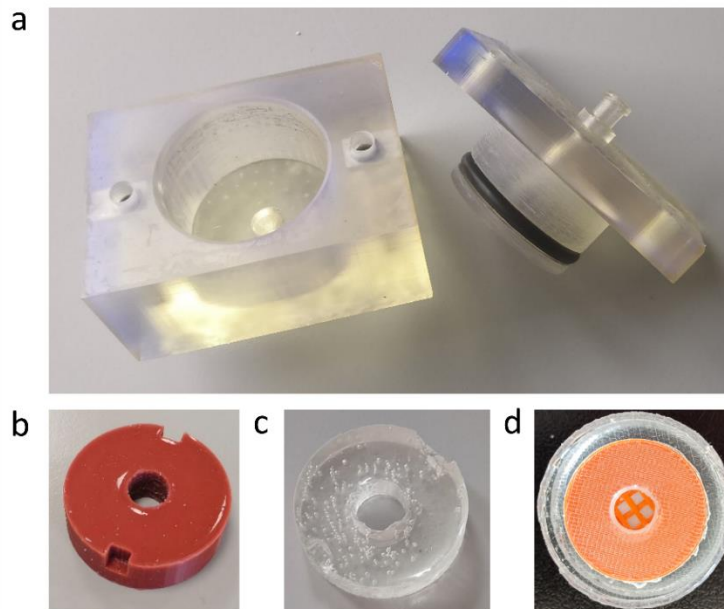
Permeability chamber components after manufacturing: a) top and bottom part with o ring inserted; b) silicone rubber holder for hard samples; c) PDMS holder for hard samples; d) gaskets and grid assembly for soft samples.
